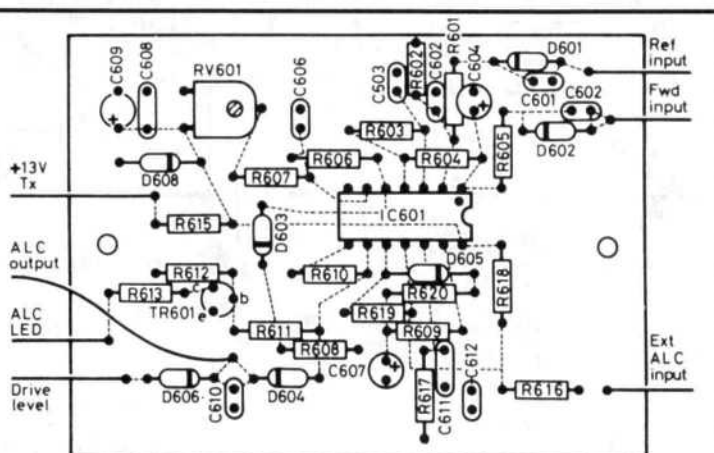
COMPONENT LAYOUTS FOR THE ALC PCB.
